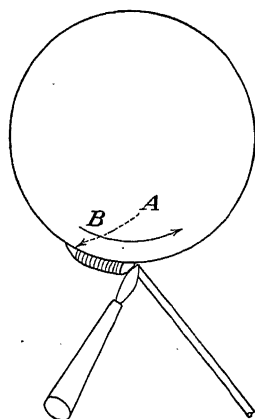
Overhead pipe weld, forehand method.
